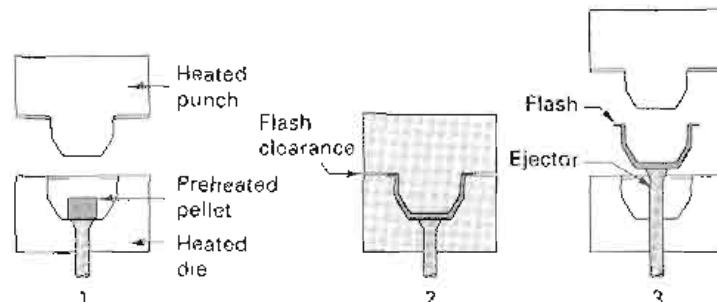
The hot-compression molding process: (1) solid granules or a preform pellet is placed in a heated die; (2) a heated punch descends and applies pressure; and (3) after curing (thermosets) or cooling (thermoplastics), the mold is opened and the part is removed.
